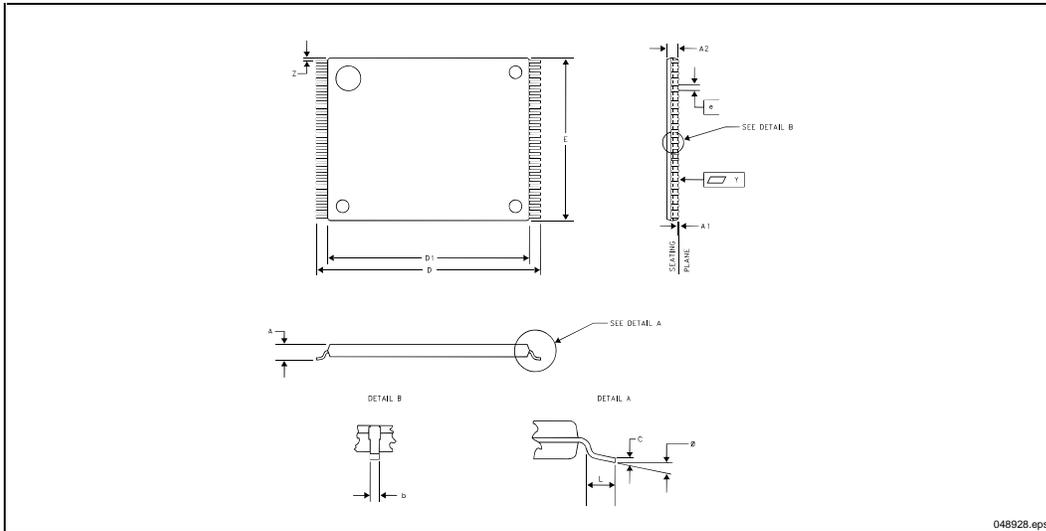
Mechanical Specifications of the 28F016SV 56-Lead TSOP Type I Package
